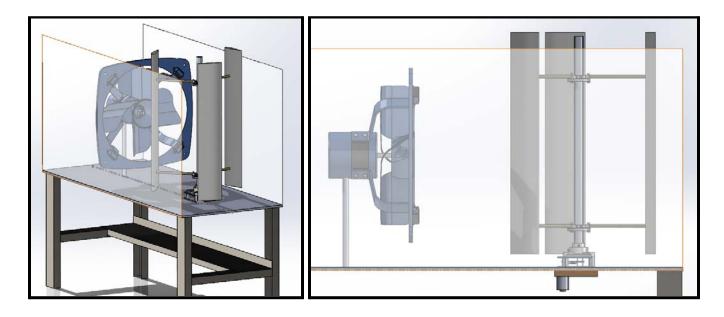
Overall Design of the cart, turbine, gearbox attachment, and a generic fan created in SolidWorks.
